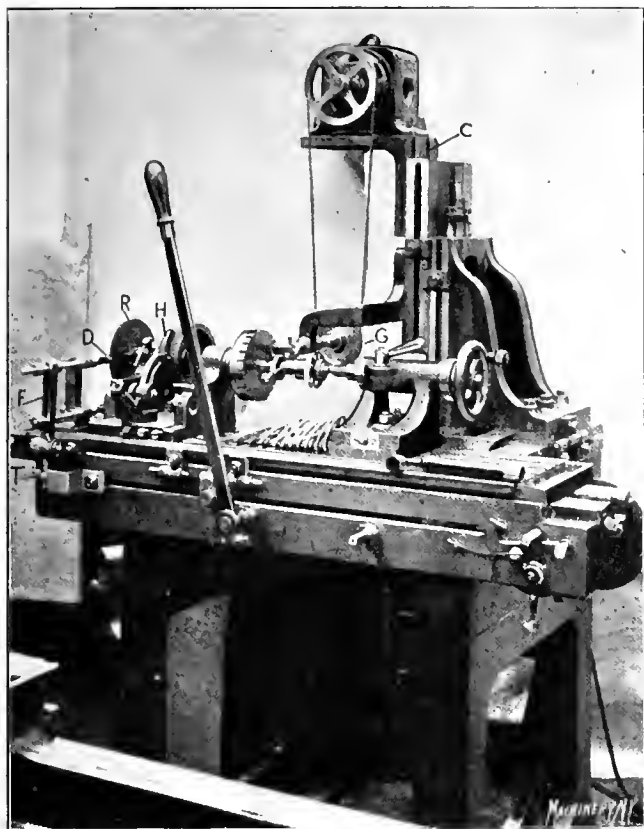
Machine for Cutting Small Spur Gears, with Automatic Indexing Mechanism and Hand Lever Feed
